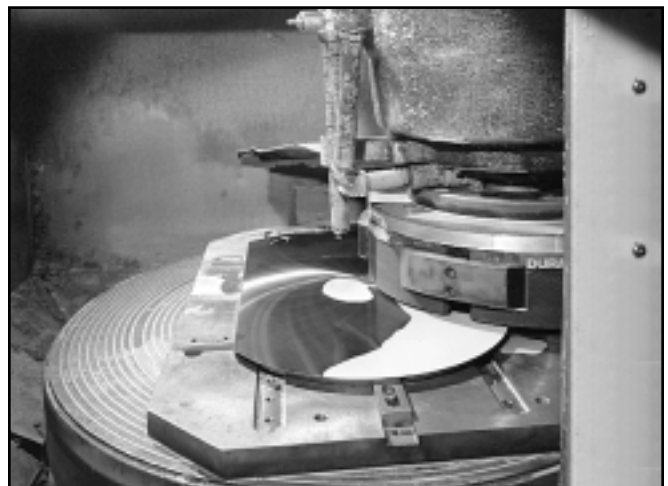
B Knife Gate Lapping with a flat plate mounted on a drill press
